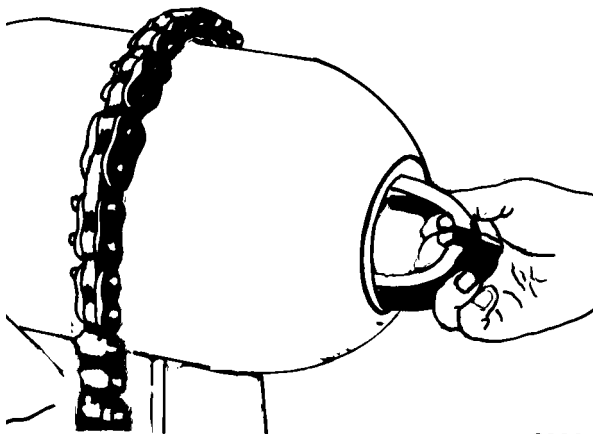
ANTI-EXTRUSION RING REMOVAL
